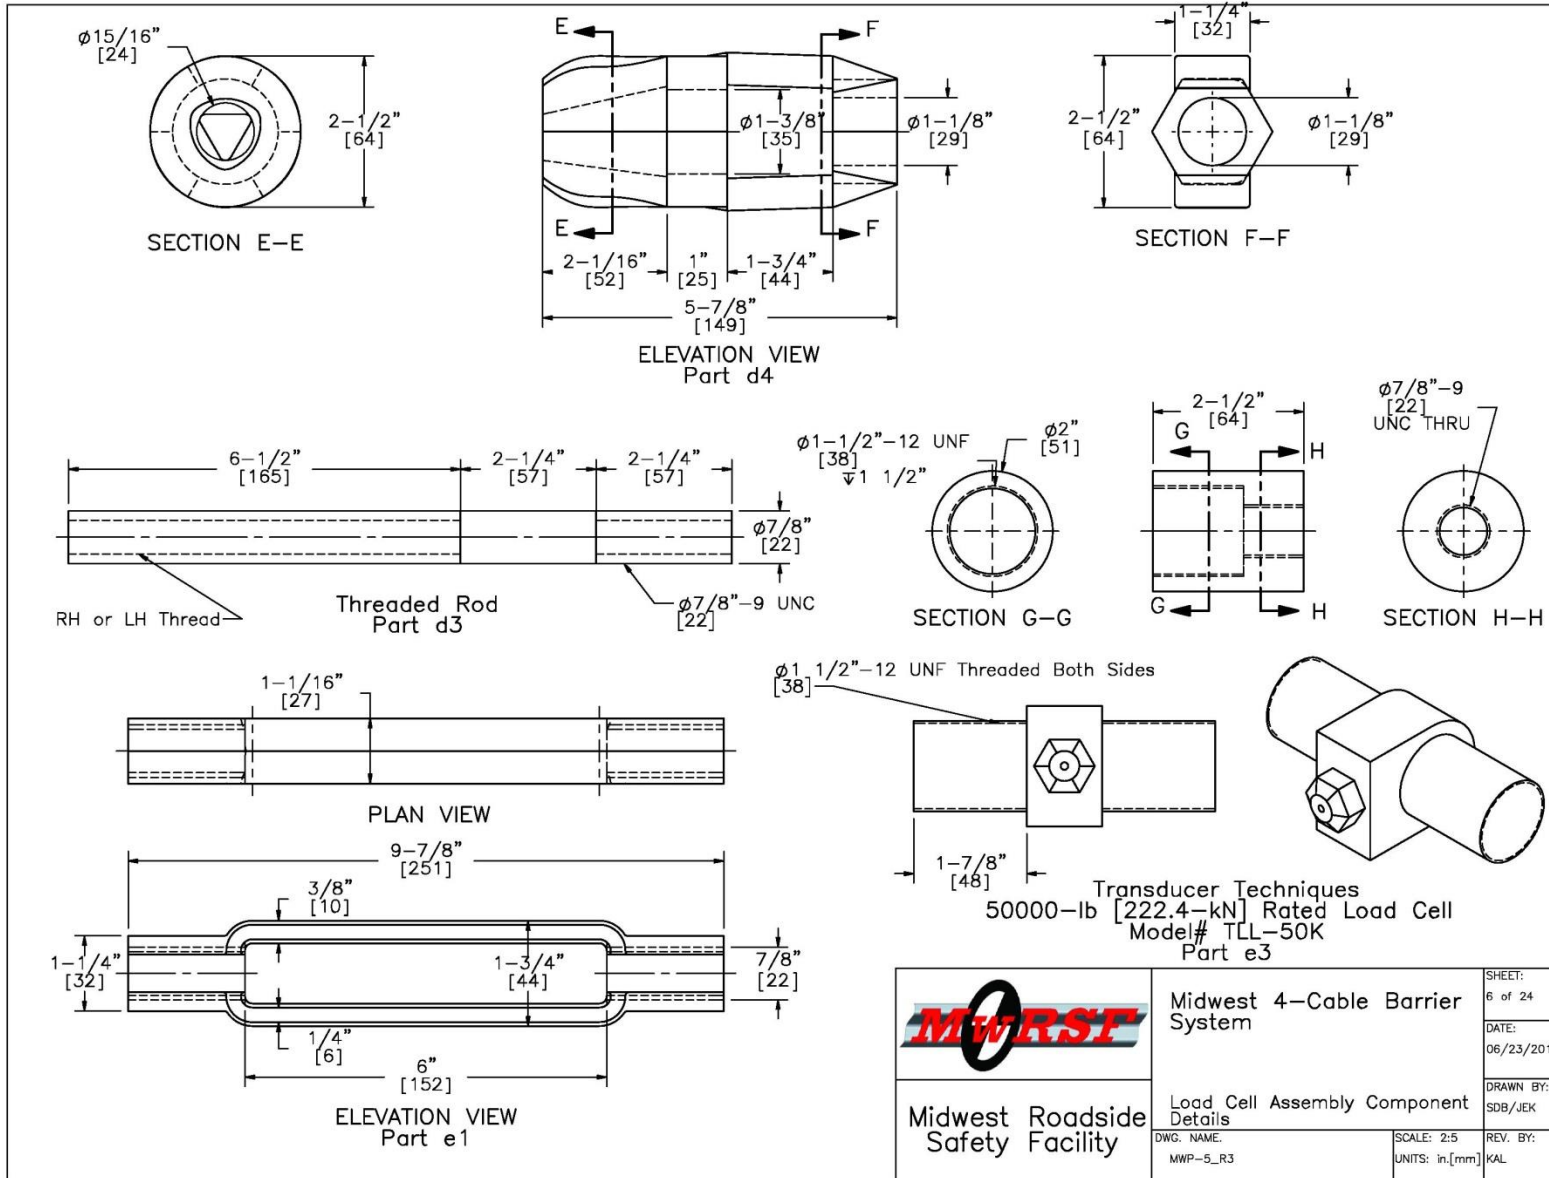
Load Cell Assembly Component Details, Test No. MWP-6
